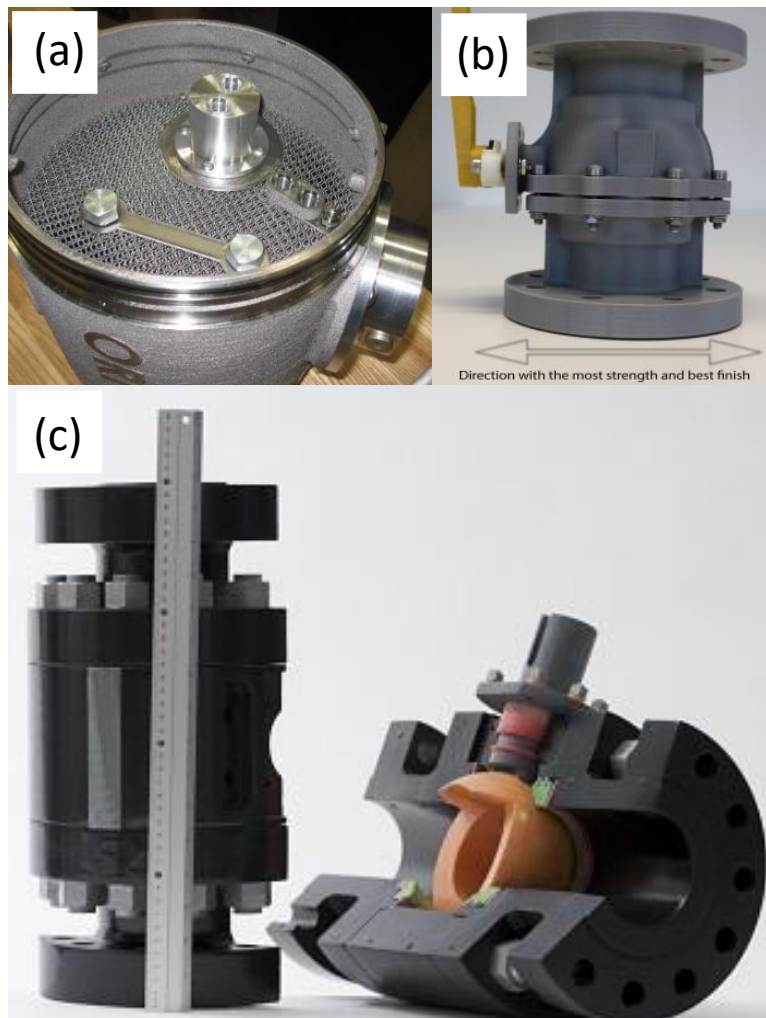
Images of several AM valves and prototypes: (a) An additive manufactured hydraulic manifold use in submersible robots by Oak Ridge National Laboratory (b) A ball valve additively printed in ABS polymer [123] and (c) Prototype of a ball valve that was made by AM.
